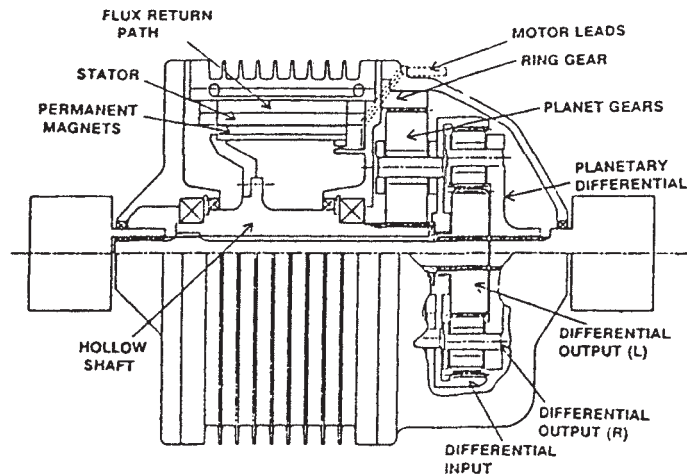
Integrated transaxle motor, gear, and differential arrangement.⁸
